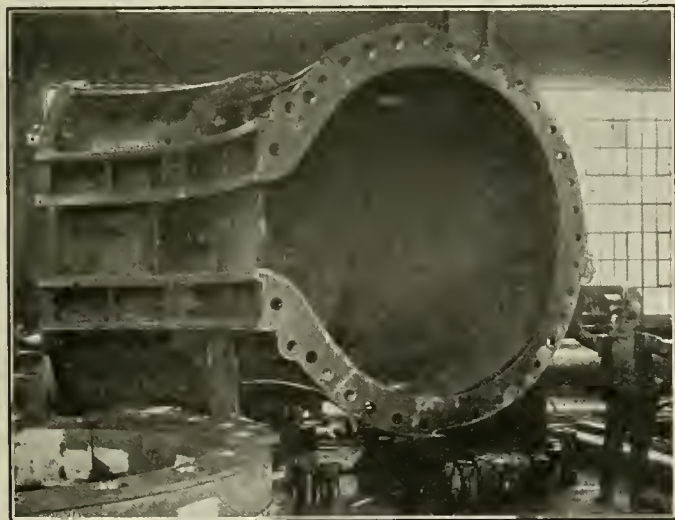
SECTION OF TAYLOR SECTIONAL SCROLL CASE SHOWING INTEGRAL CAST STAY VANES AND JOINTS SUBDIVIDING SECTIONS
